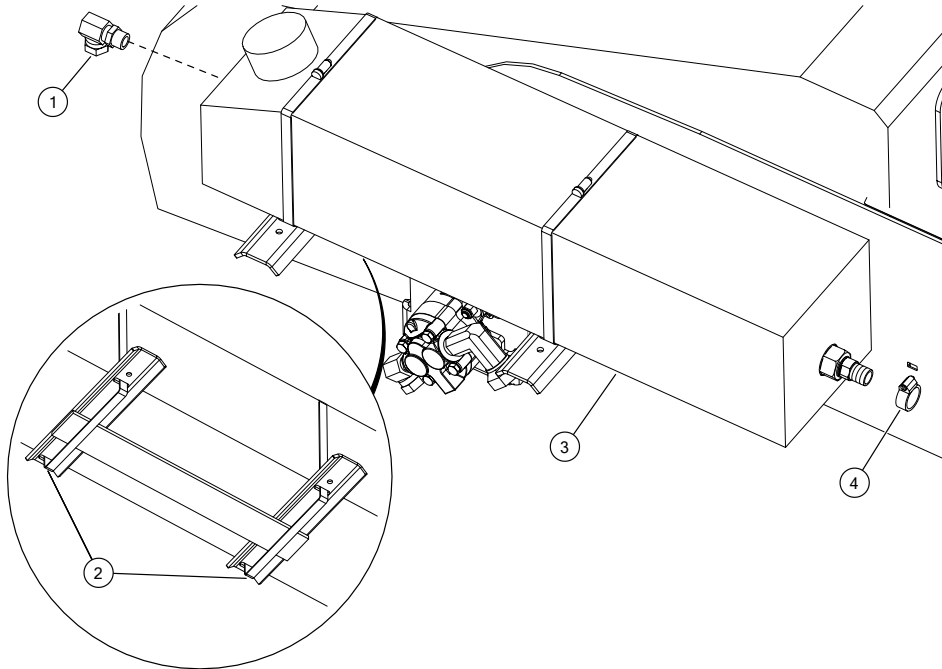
Step 4: Install the Hydraulic Pump Side Guard (on both sides)
